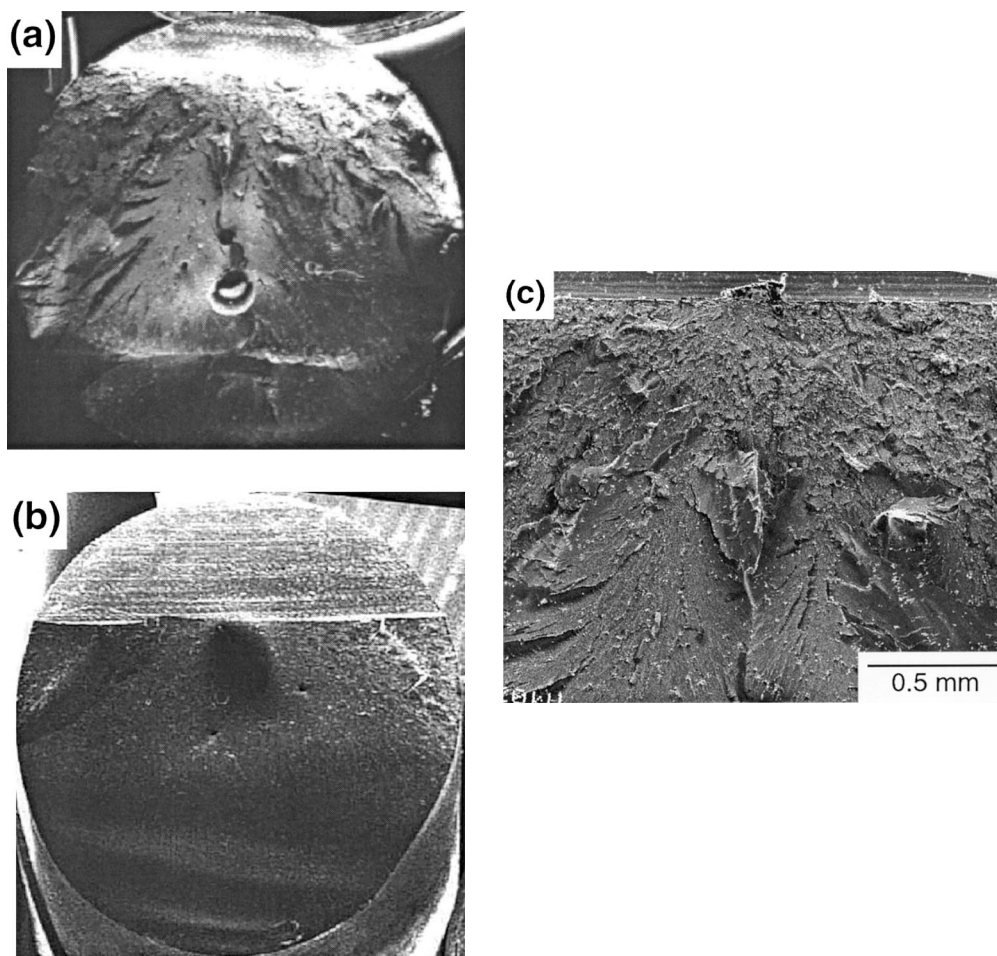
Macroscopic observation of fractured surface in (a) the as-quenched specimen and (b) the specimens with a  $\chi \sim 34\%$ . (c) Higher magnification view of the notch root of the as-quenched specimen showing jagged fracture surface.
